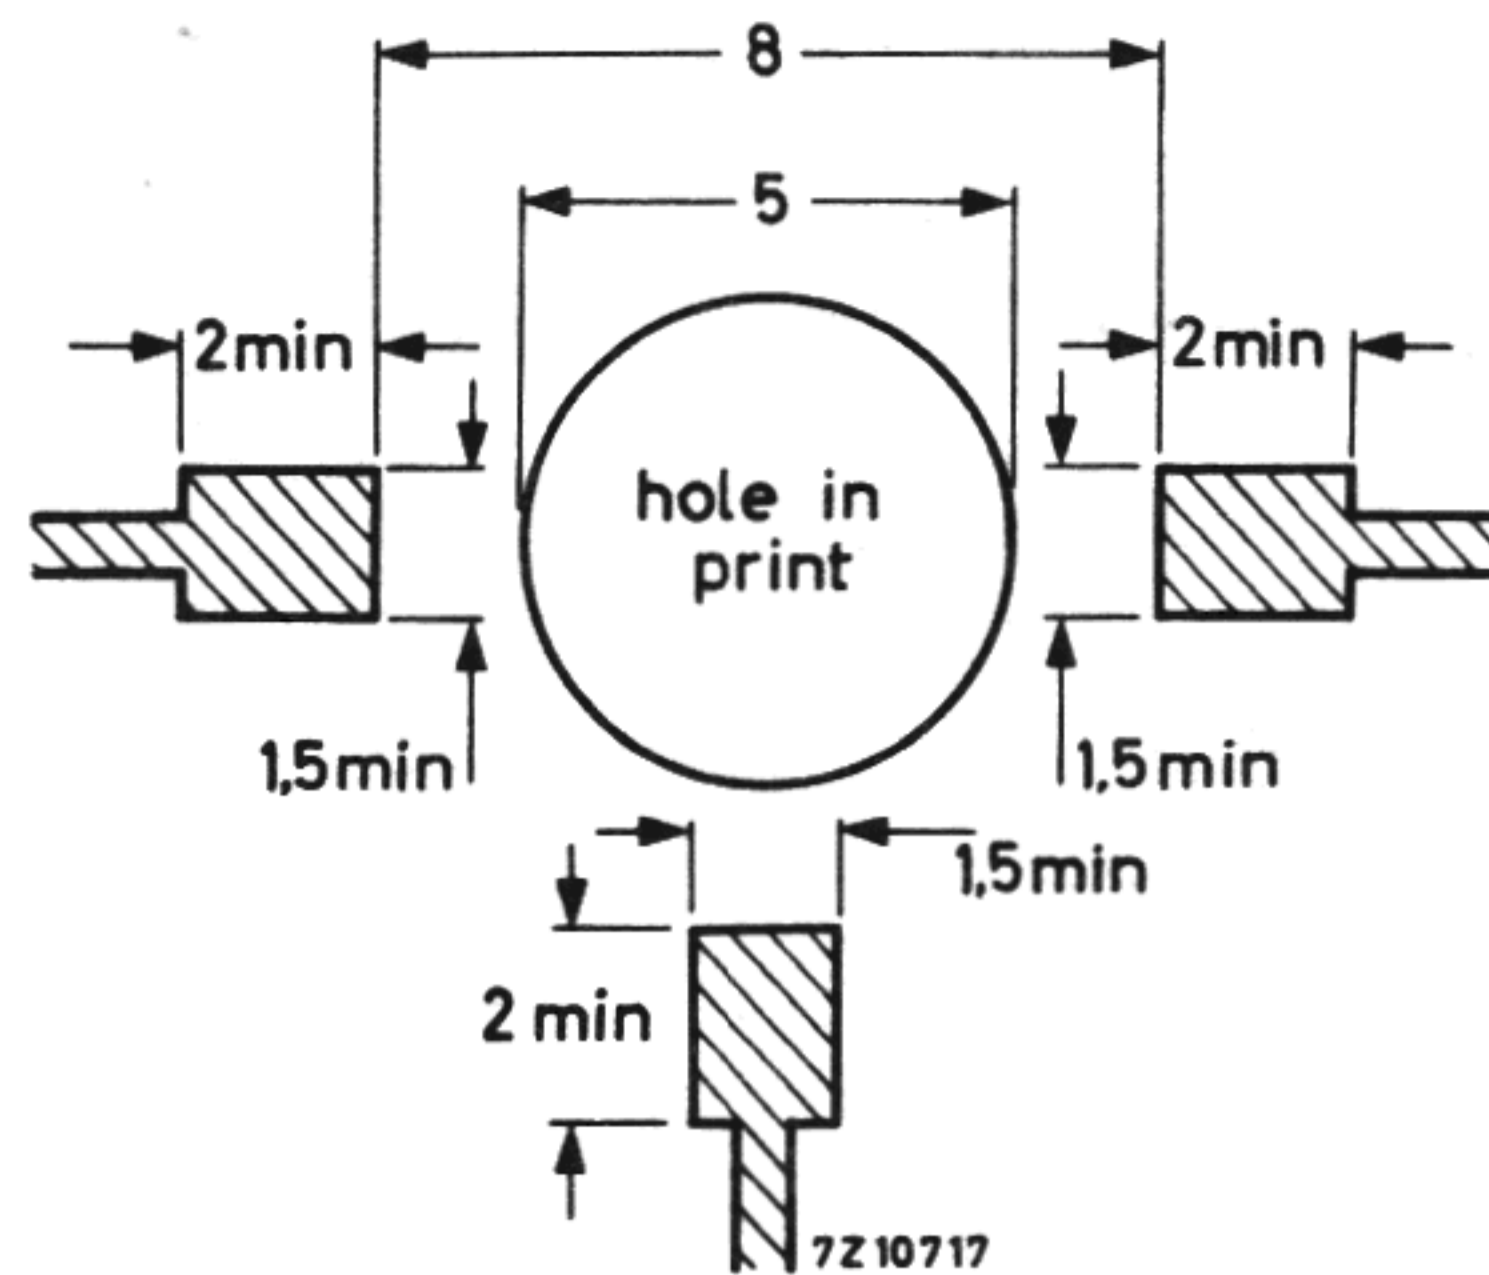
Requirements for fibre-glass print. (Dimensions in mm.)
